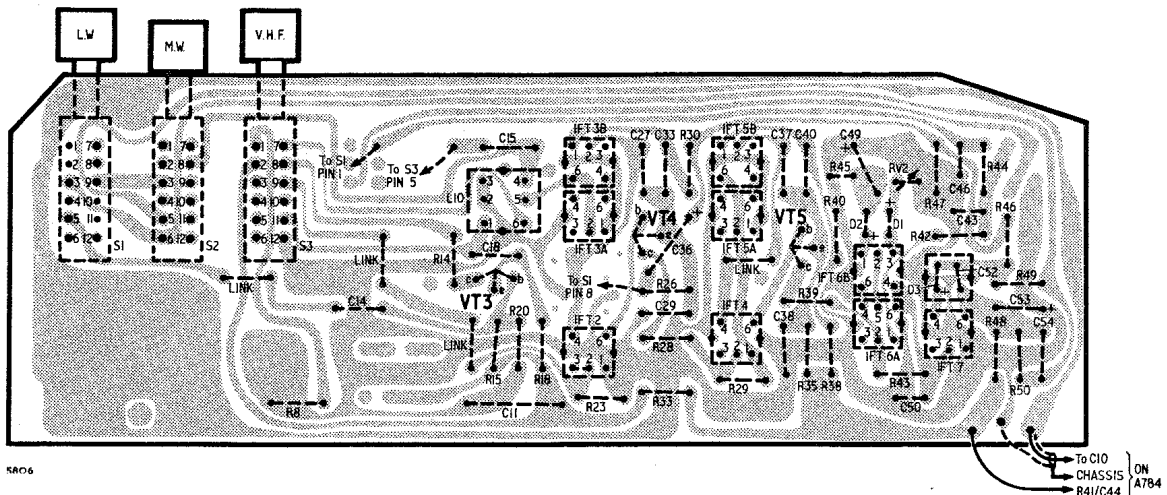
I.F.-R.F. panel (Z120) - printed side
